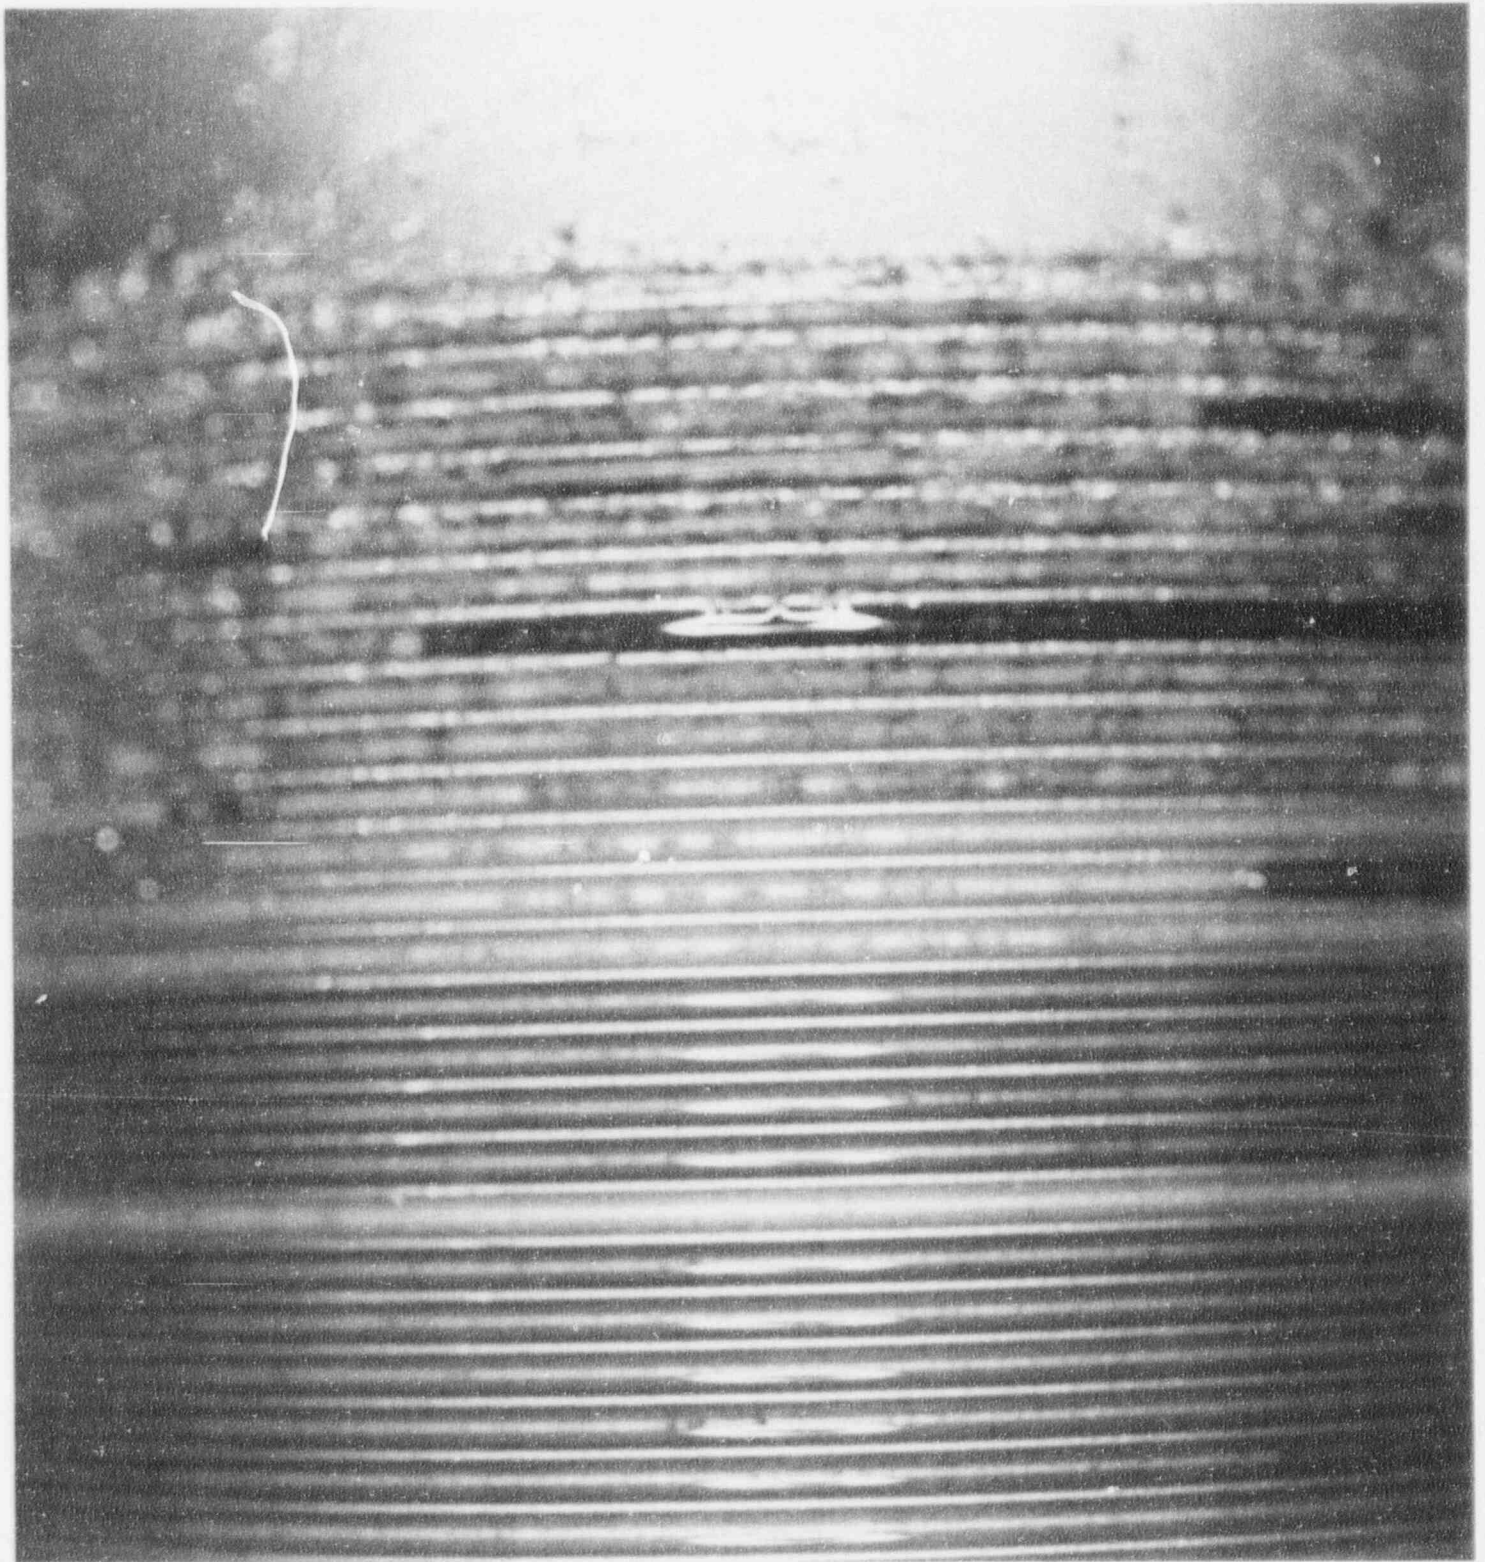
Typical EDM Notch As Machined In The Root Of A Thread In Cooper Stud # 14.
